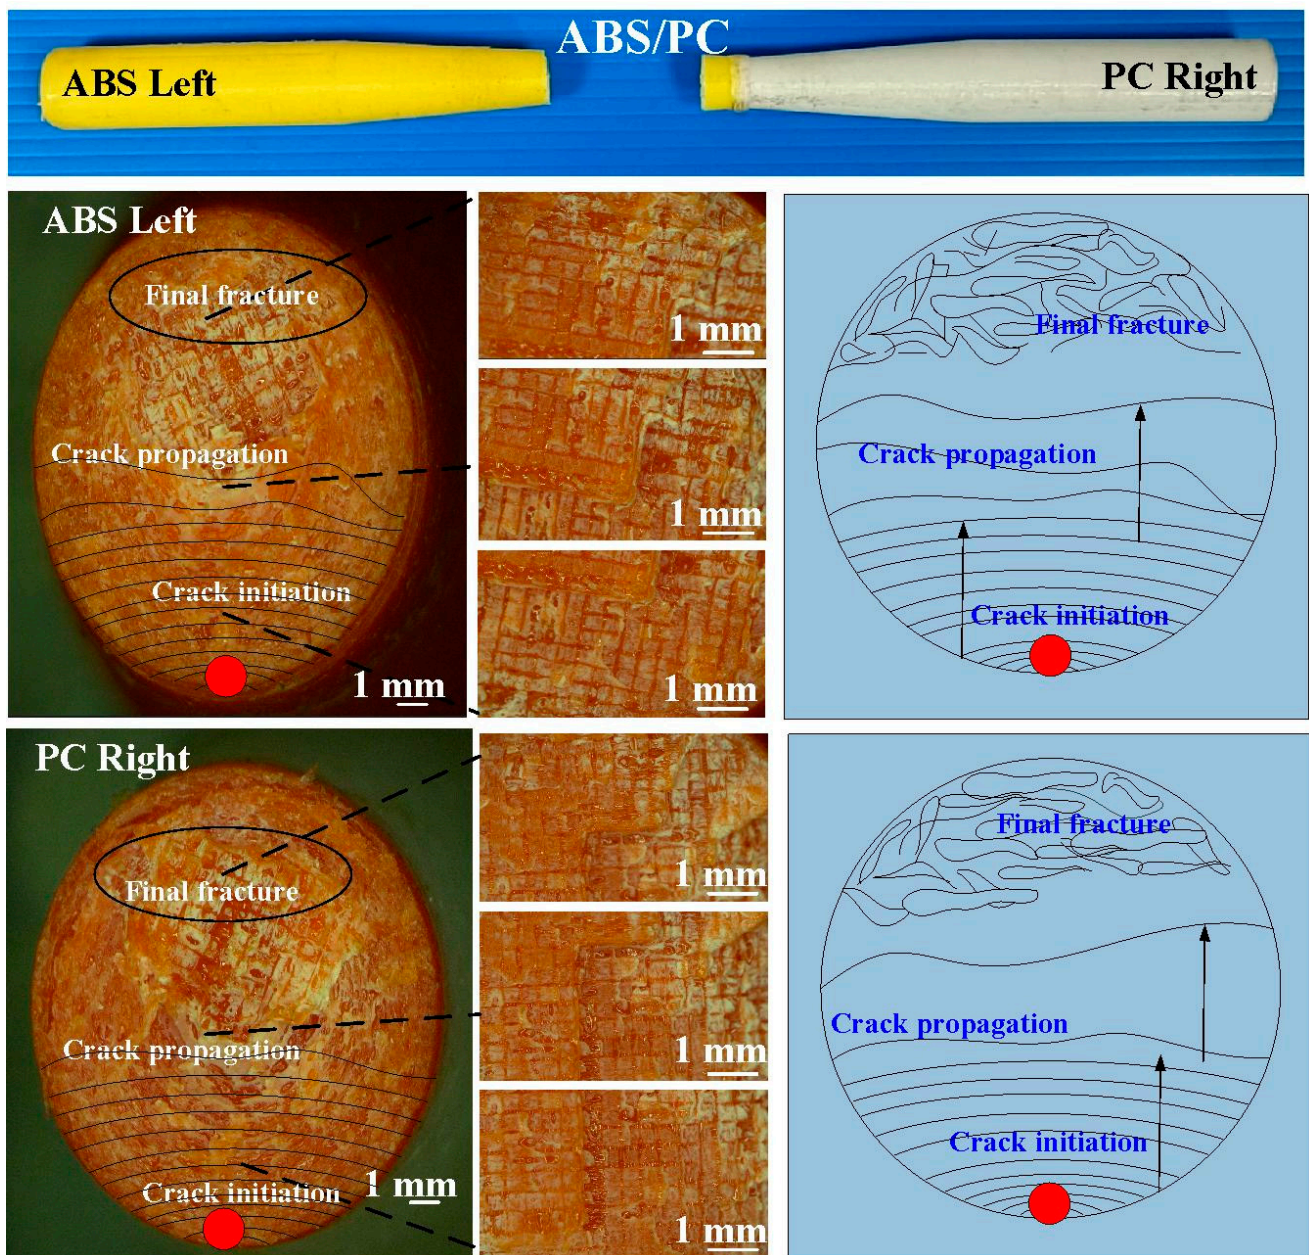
Fatigue failure surface of the RFW of ABS/PC.
